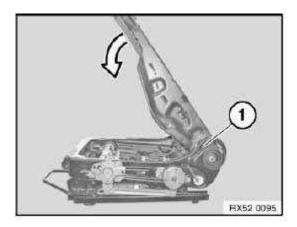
Removing Seat Courtesy of BMW OF NORTH AMERICA, INC.
